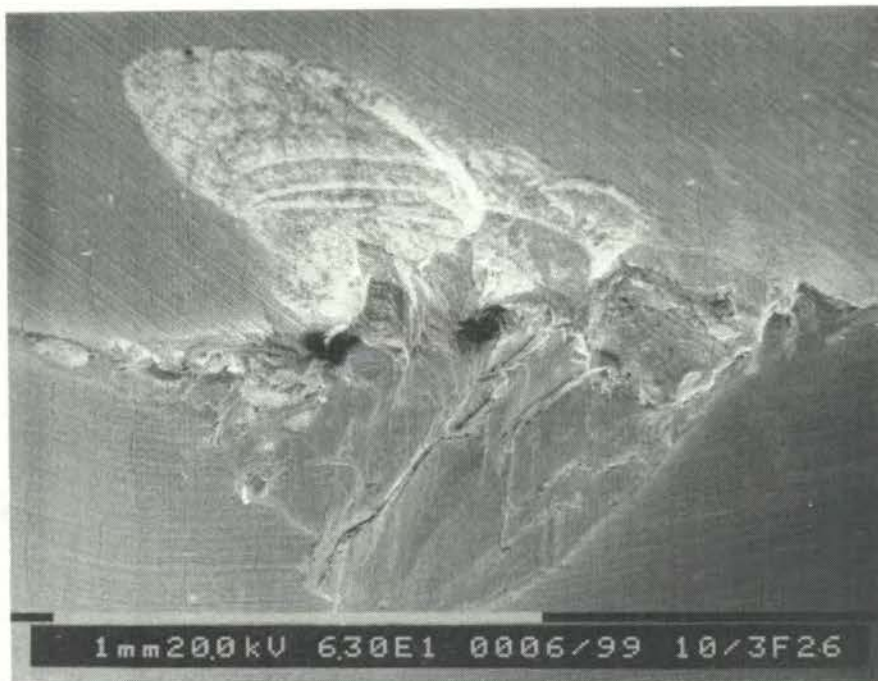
30 Catastrophic failure of KC730 tool due to severe breakage and flaking at 75 m/min and 0.14 m/min after cutting Inconel 718 for 26 seconds
